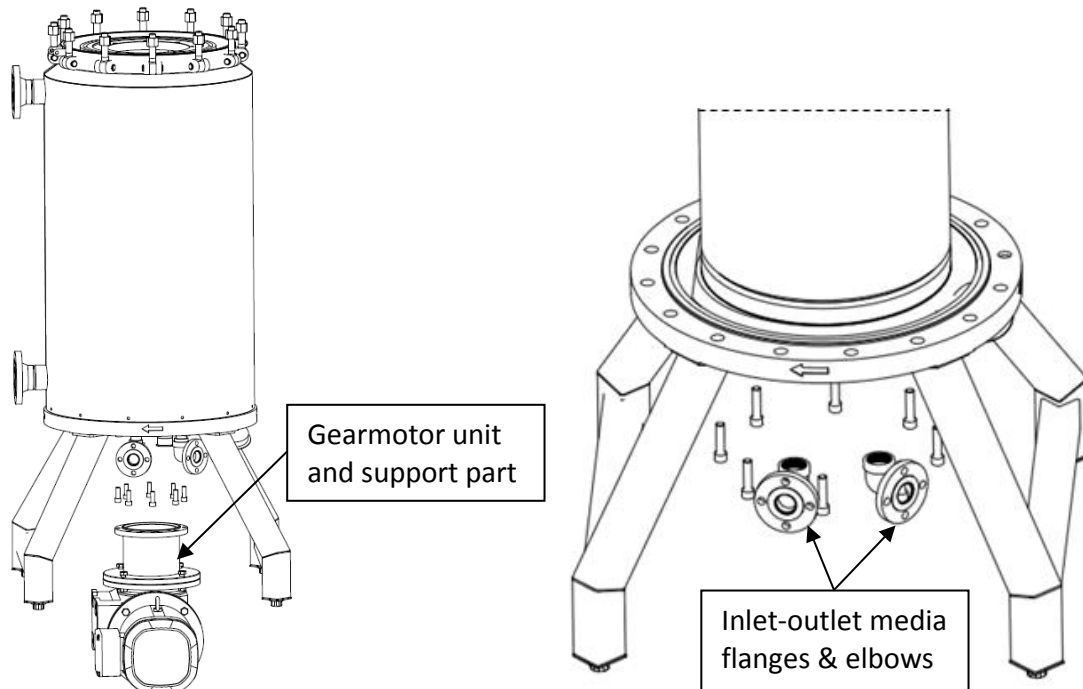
Inlet-outlet media flanges & Overflow bottom pipe
